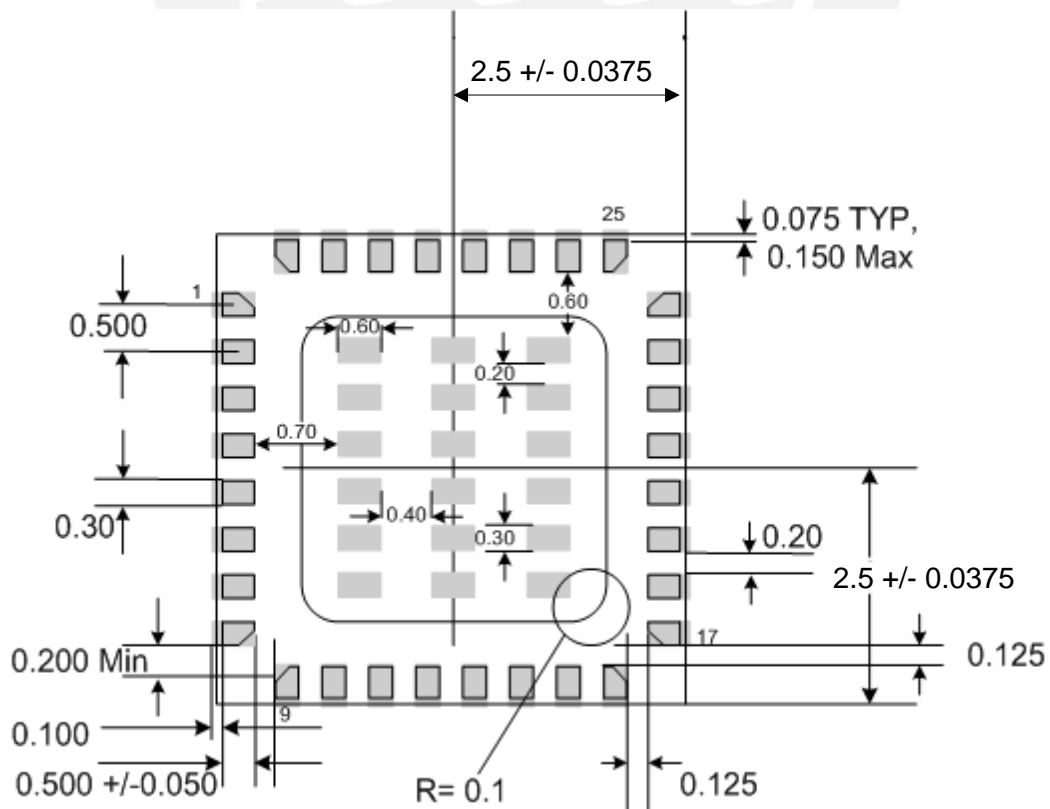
Typical Solder Paste Diagram for QFN-32 Package
